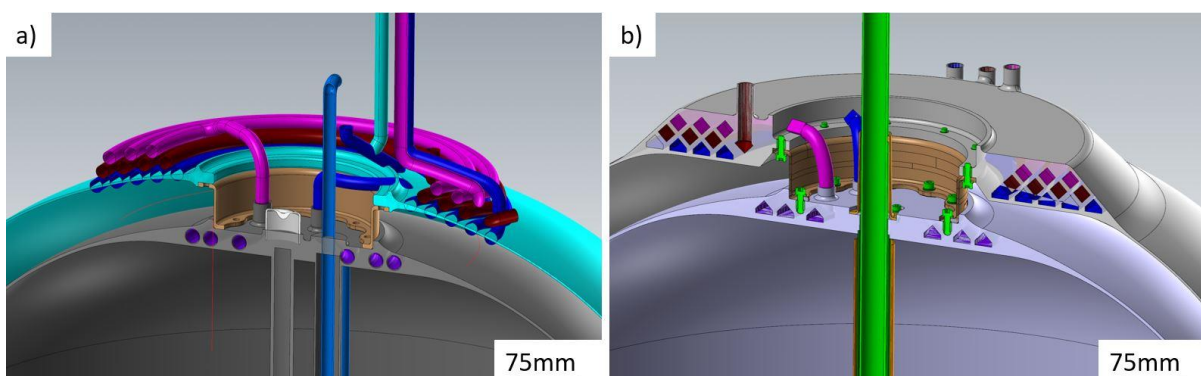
a) Cross-section of model draft with functional integration of the heat exchanger pipes and the connecting elements. b) Cross-section of the final model with integrated heat exchanger into the tank shells. Optimizations according to welding trials implemented in the design.
